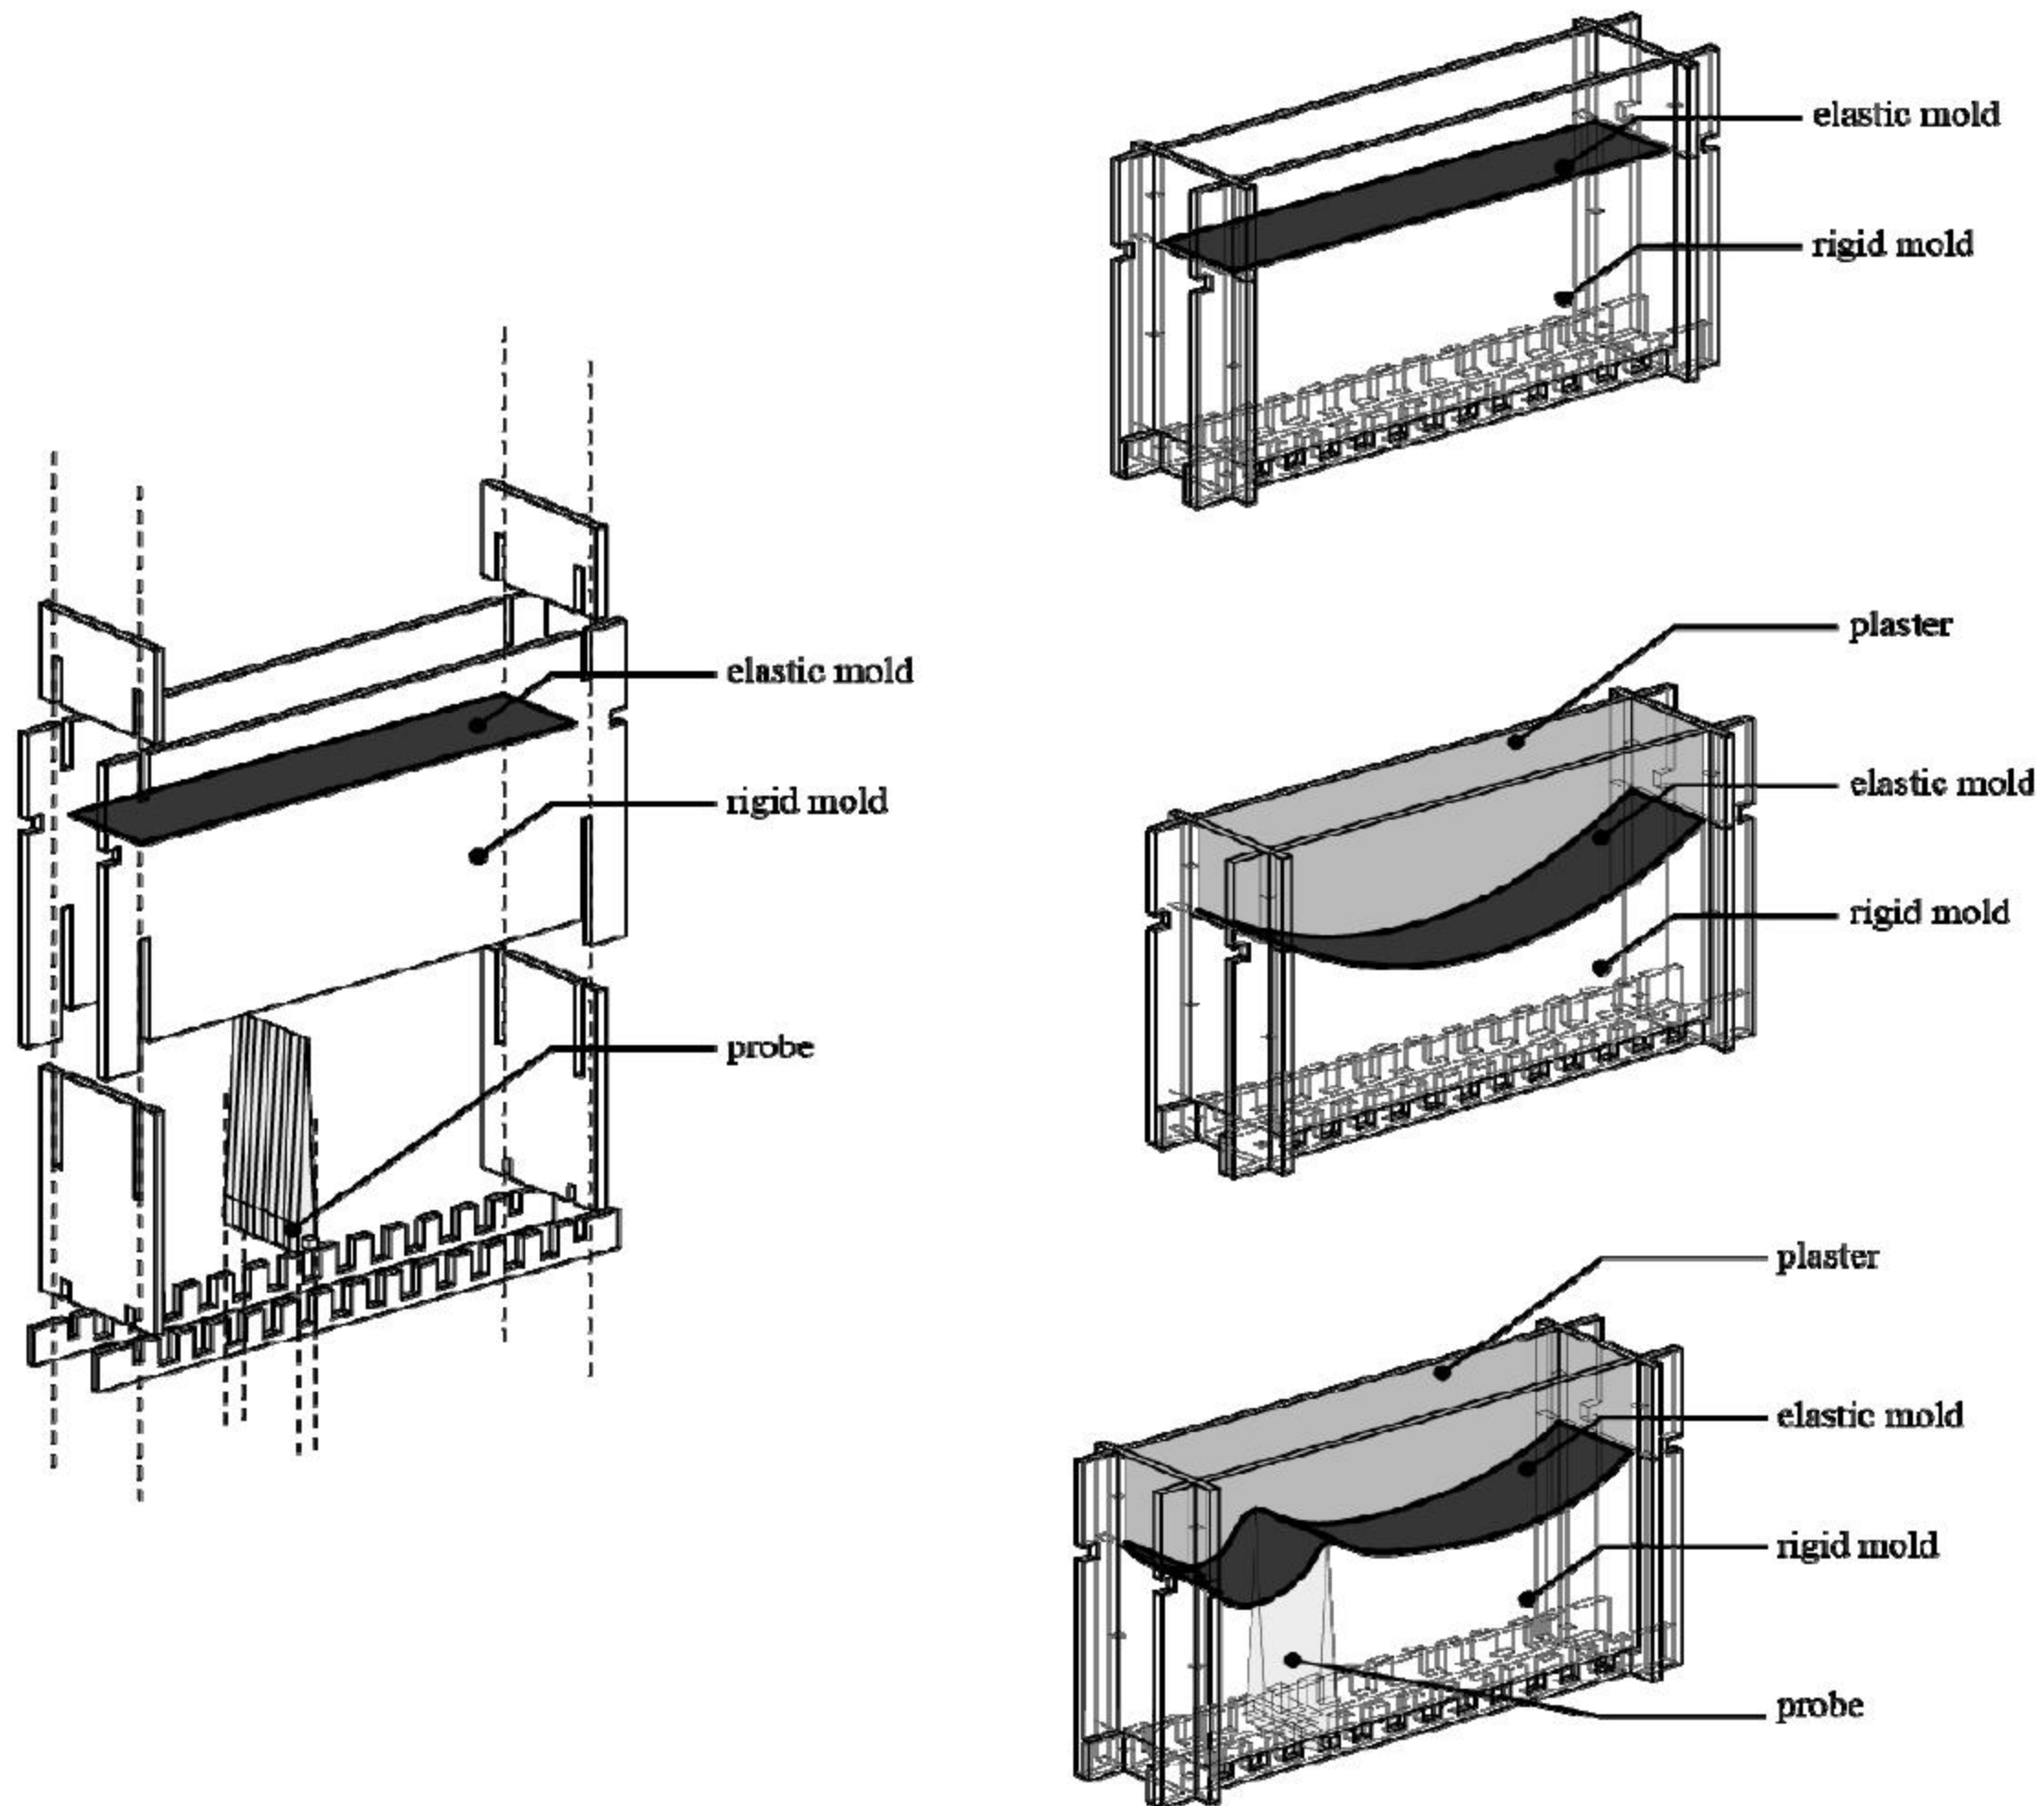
Diagram of the assembly of mold for the physical model (on the left), form in becoming when plaster is poured in the mold (on the right)
